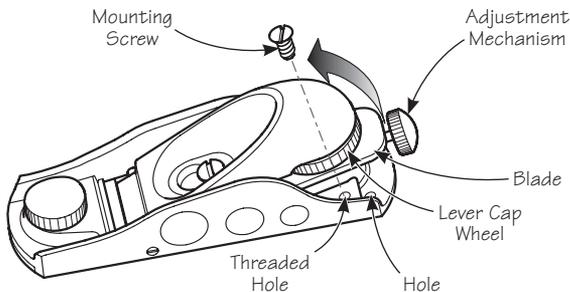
Heel of blade moved to expose threaded hole for mounting rear handle.
